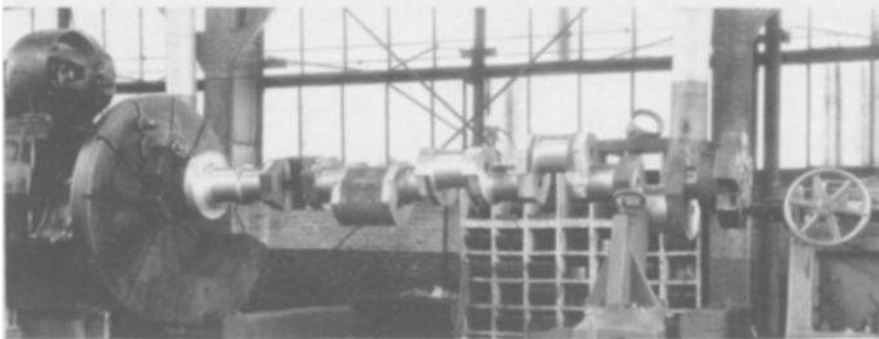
Crankshaft after notching the crankpins and during rough machining. The main and crankpin bearing journals were 9.5 in. (238 mm) in diameter.
